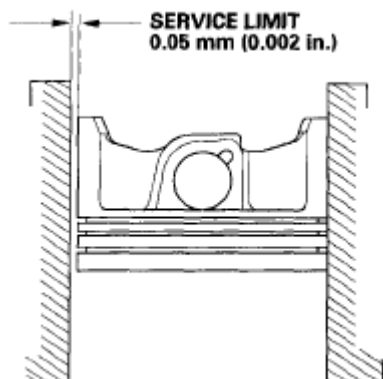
Identifying Calculate Difference Between Cylinder Bore Diameter And Piston Diameter
